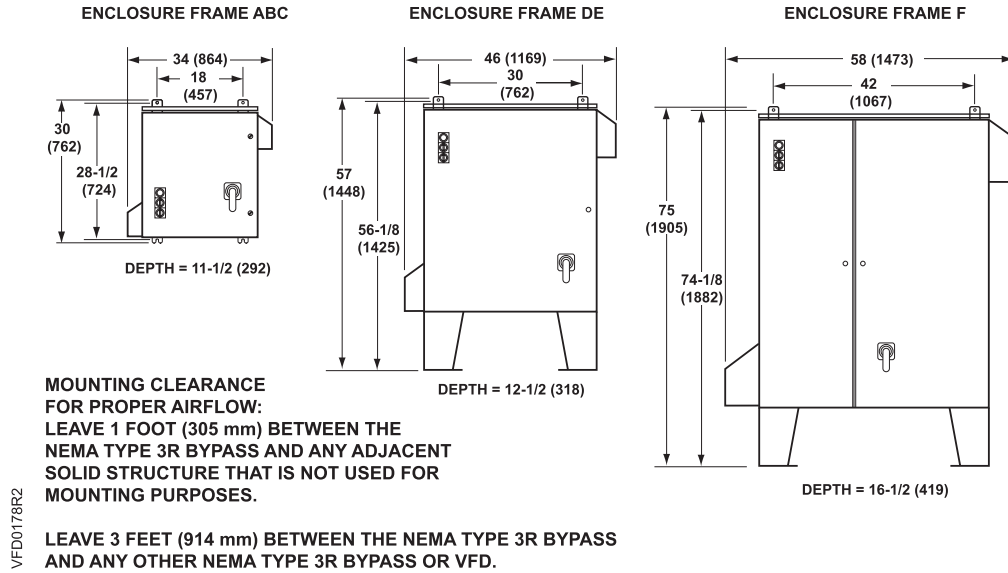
Type 3R Enclosure Dimensions in Inches (Millimeters).
